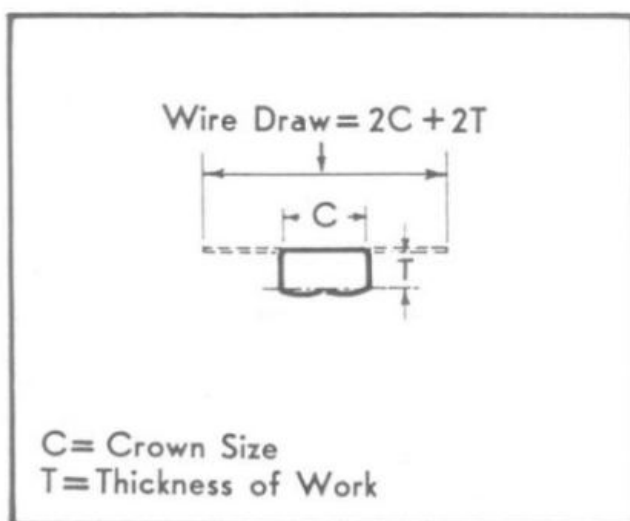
Wire Draw Dimensions and Formula for .175 (4.4mm) thru 1/2" (12.7mm) Crowns
